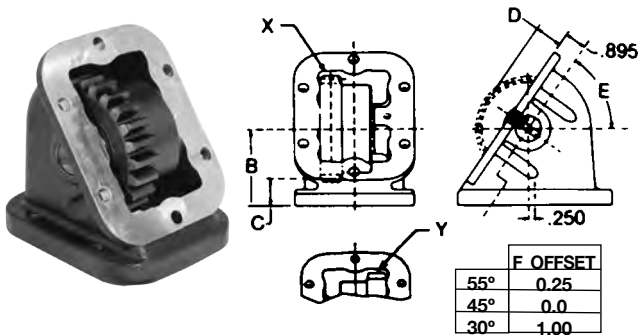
SOLID BODY-SINGLE GEAR
